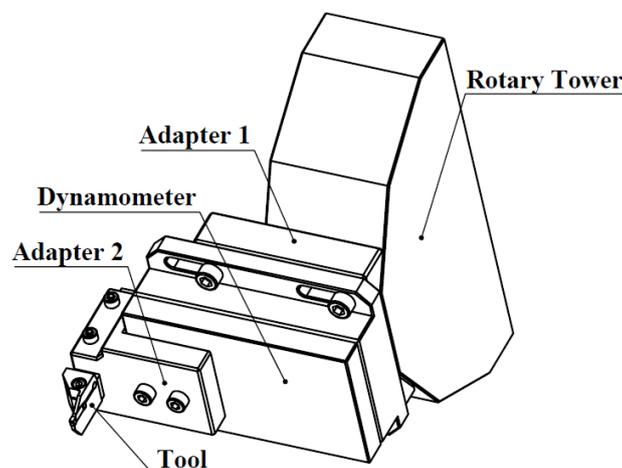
Detail of the dynamometer attachment on the CNC lathe.
